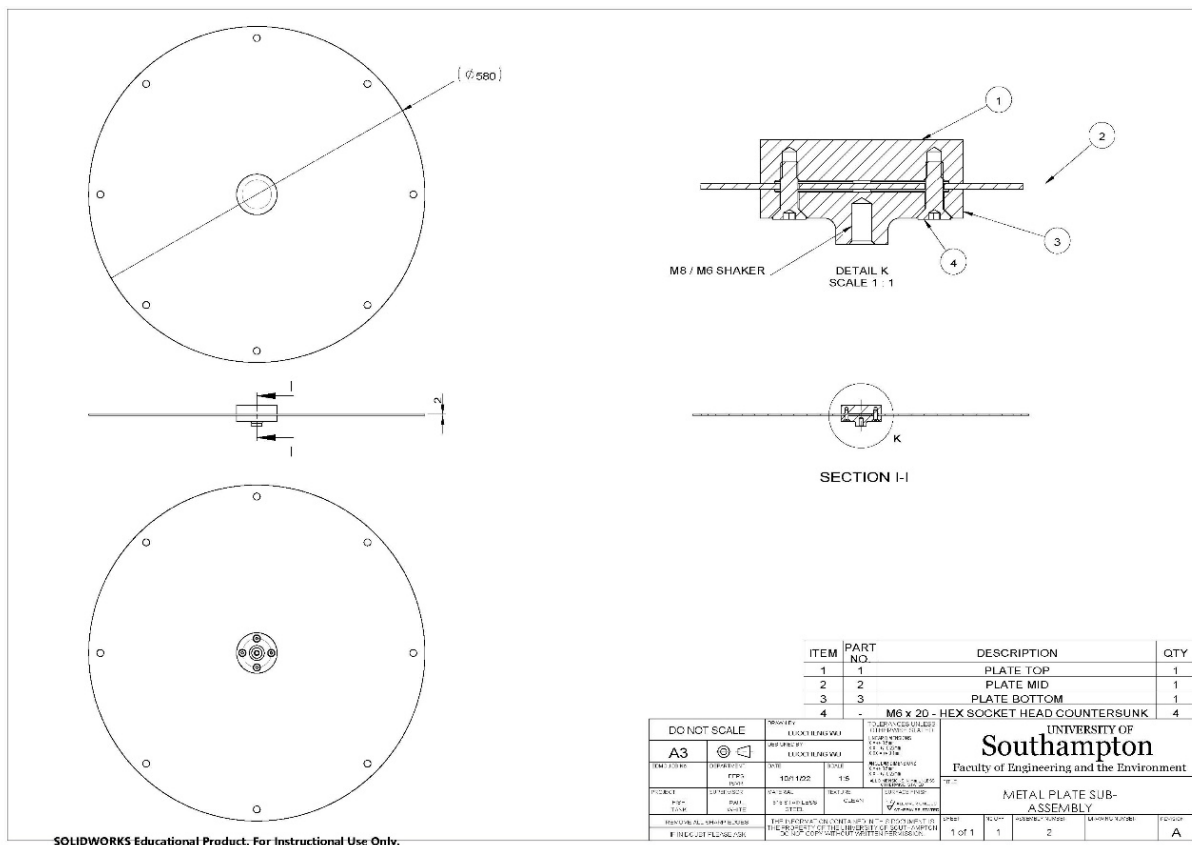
The 2-D engineering drawing of the tank bottom plate sub-assembly.
